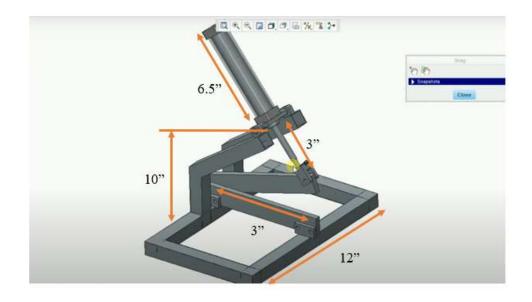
3D drawing of Pneumatic Sheet Metal Cutting Machine
